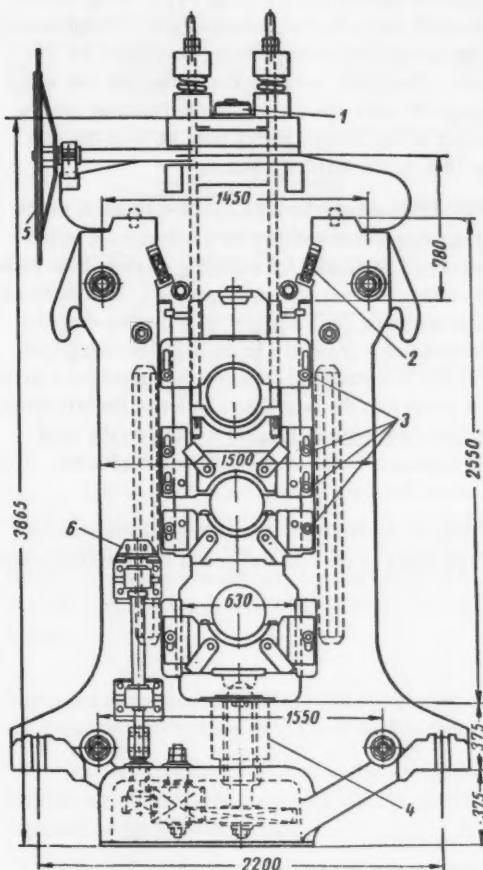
New frame of roll stand: 1) Screwdown gear of upper roll; 2) cotter fastening of the cover; 3) bolts of the axial displacement; 4) screwdown gear of the lower roll; 5) steering wheel of the upper screwdown gear; 6) steering wheel of the lower screwdown gear.
